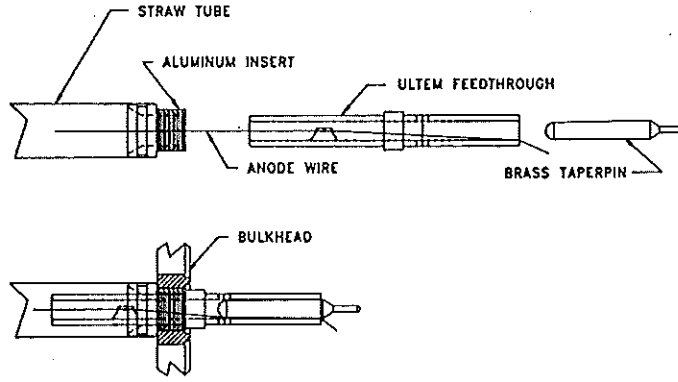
The final end-plug assembly consists of an Ultem feedthrough that fits inside the aluminum insert, and a brass taper pin that is inserted into the Ultem feedthrough to fix the anode wire.
